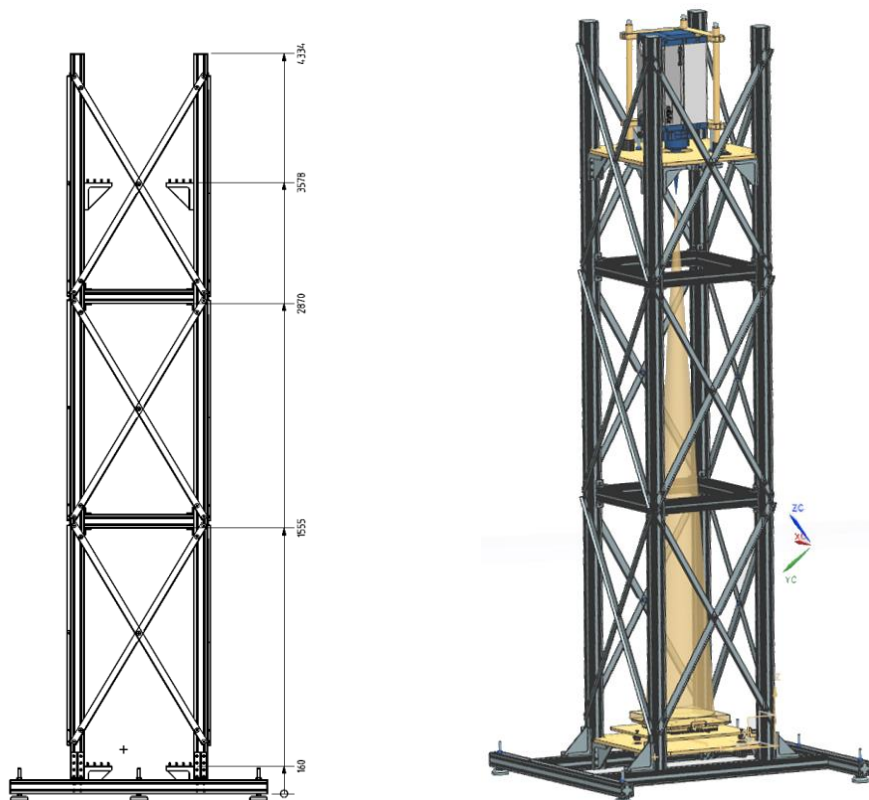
The optical test tower designed and built by the Precision Engineering Institute at Cranfield University (*source*: R. Jourdain): technical drawing (*left*) and 3D view (*right*).
